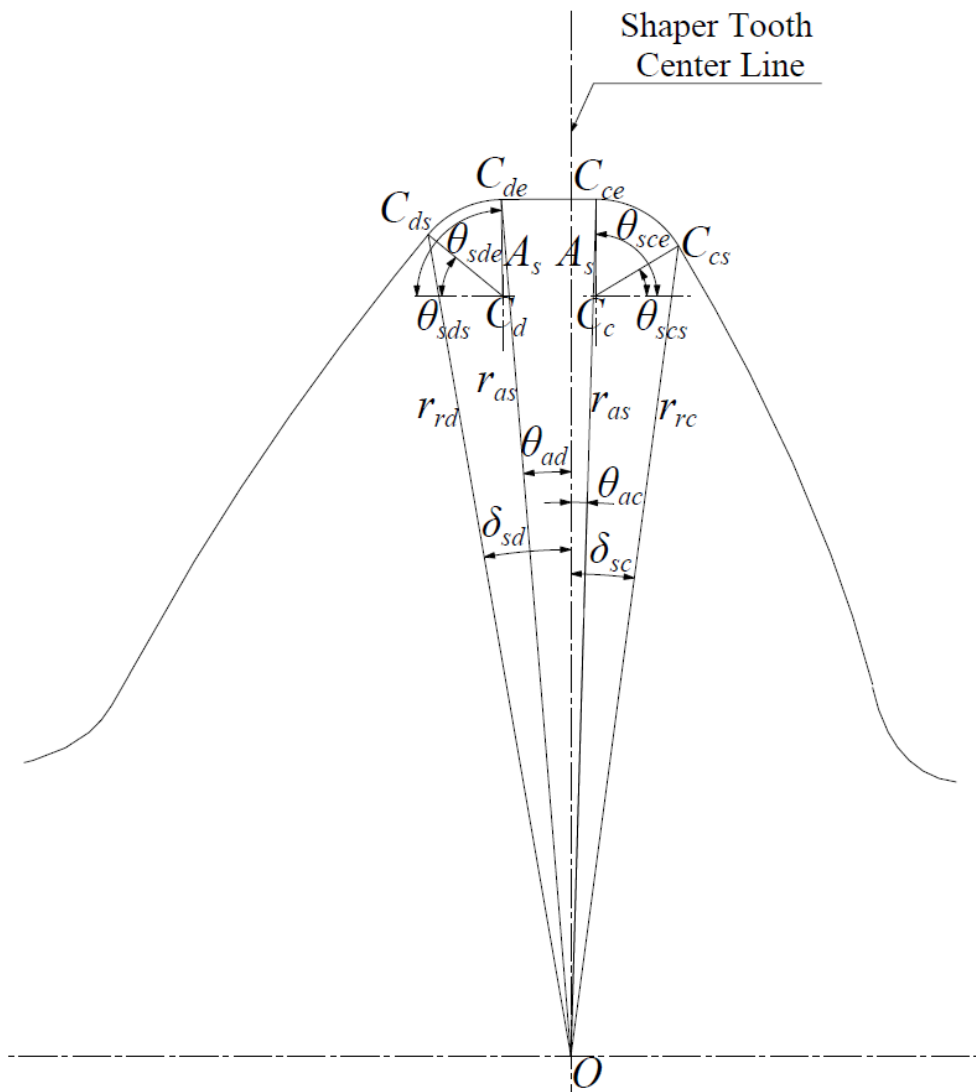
The asymmetric shaper cutter rounded surfaces parameters 1
